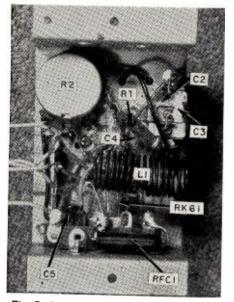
Bottom view of the receiver. The RK-61 tube, which has no socket, is mounted along the centerline of chassis.
